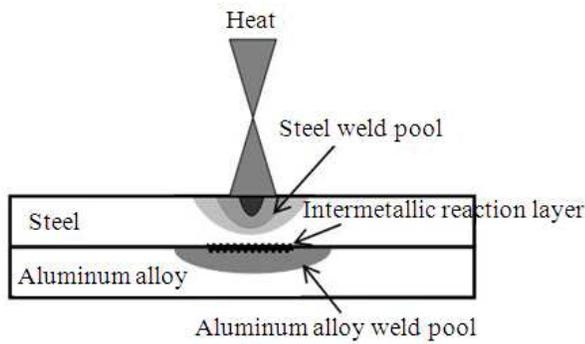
Schematic of the interface during dissimilar metals welding between steel and aluminum alloy [13]
